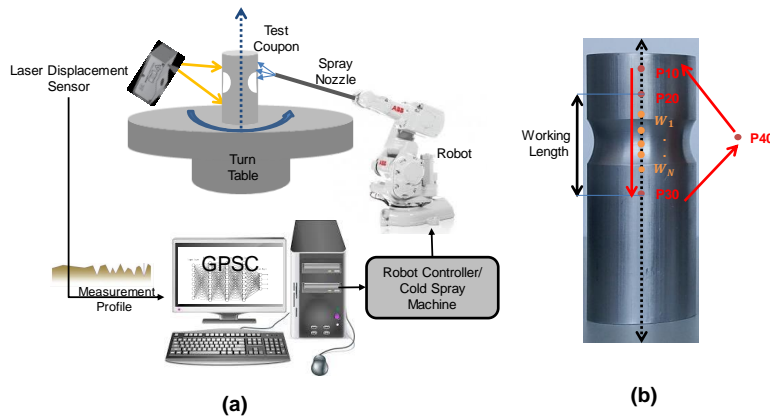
a) Cold spray closed loop experimental setup. b) Cylindrical test coupon with a notch.
